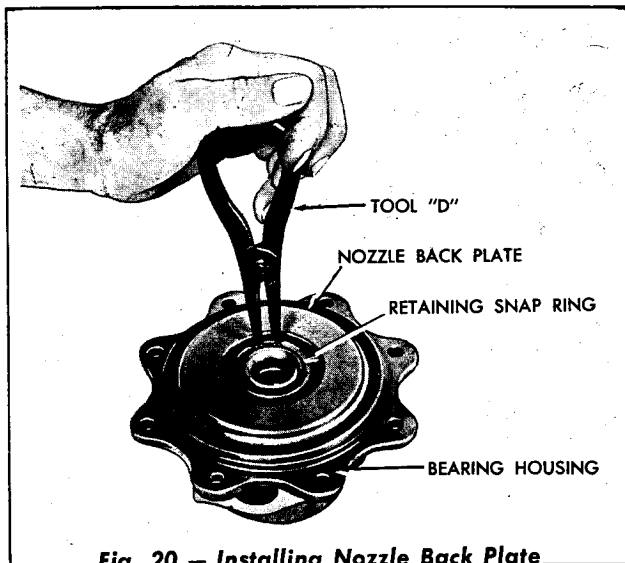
Installing Nozzle Back Plate Retaining Snap Ring
